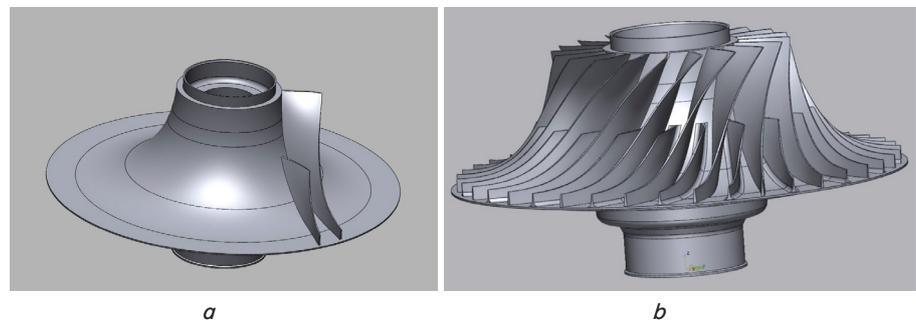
Complete digital model of the impeller: *a* – basic digital 3D model of the impeller before replicating the blades; *b* – digital 3D model of the impeller
